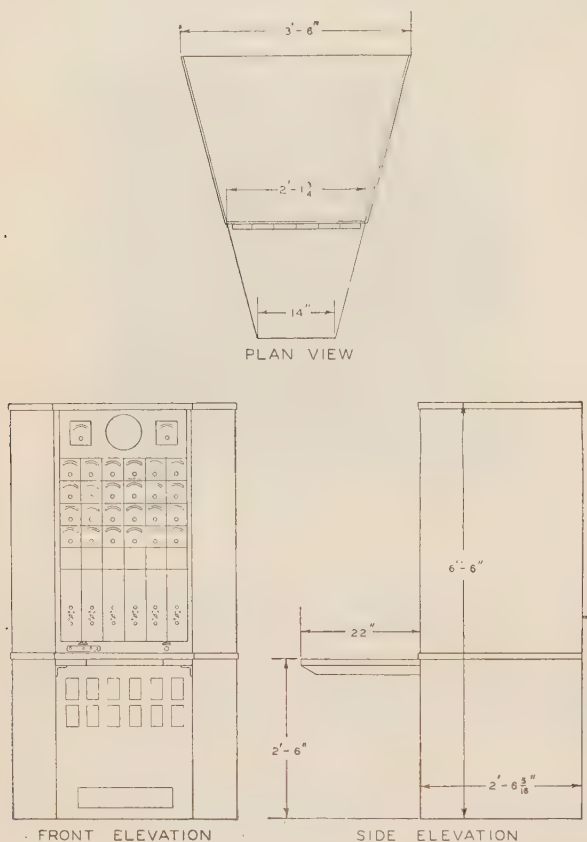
TYPICAL UNIT FOR ZANESVILLE 132-KV. SUBSTATION SWITCHBOARD
